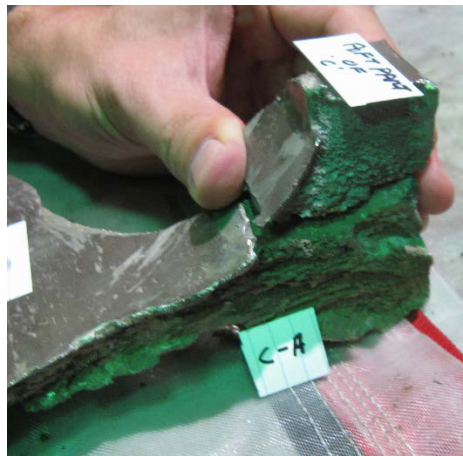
MATCHED FRACTURE SURFACES 'C'-TO-'A'
